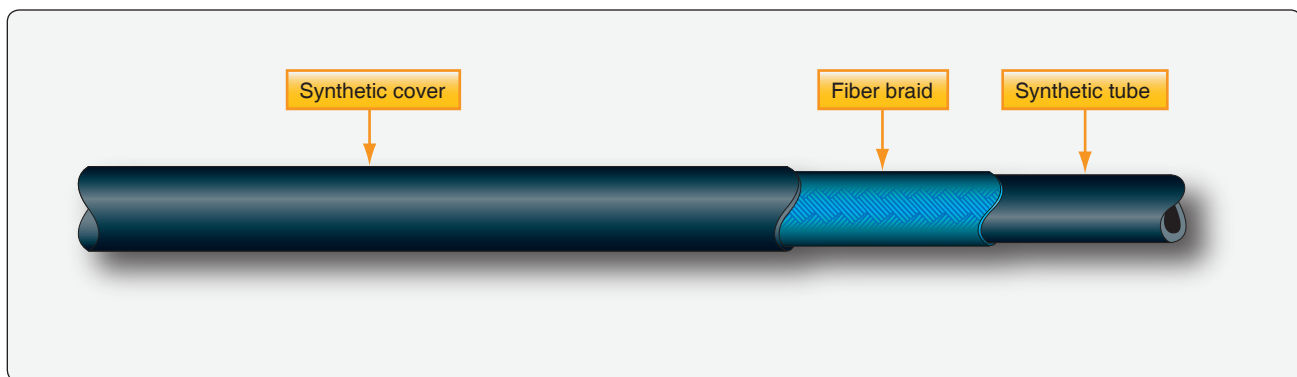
A typical flexible aircraft fuel line with braided reinforcement.
